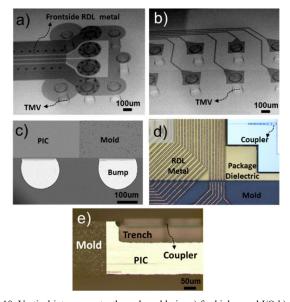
Vertical interconnects, through mold vias a) for high-speed I/O b) for DC. c) Cross-sectional image of package backside bumps. d) Front side of the package showing optical coupler at package edge e) Optical I/O side diced to expose couplers
